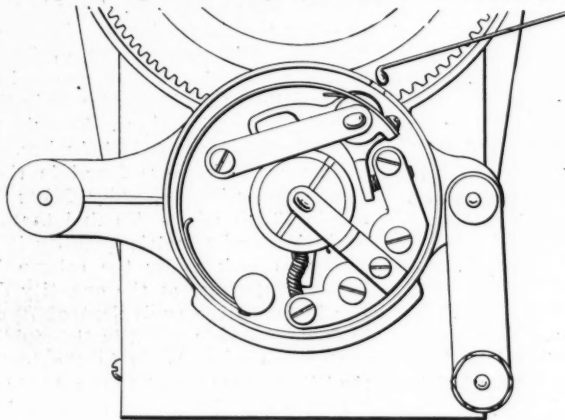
Interior view of breaker box on Dixie magneto, with cover removed
